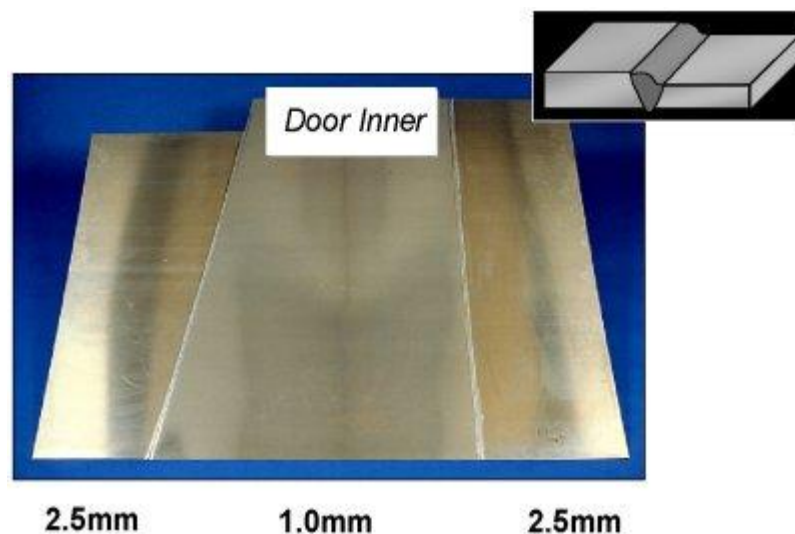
A tailor welded door inner ready for forming (Reynolds Metals Company and Ogihara America Corporation, 2007)
